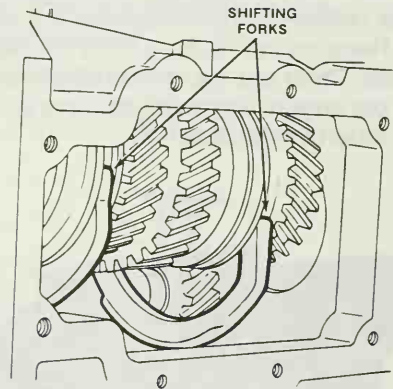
Shifting fork removal. (American Motors Corporation)
